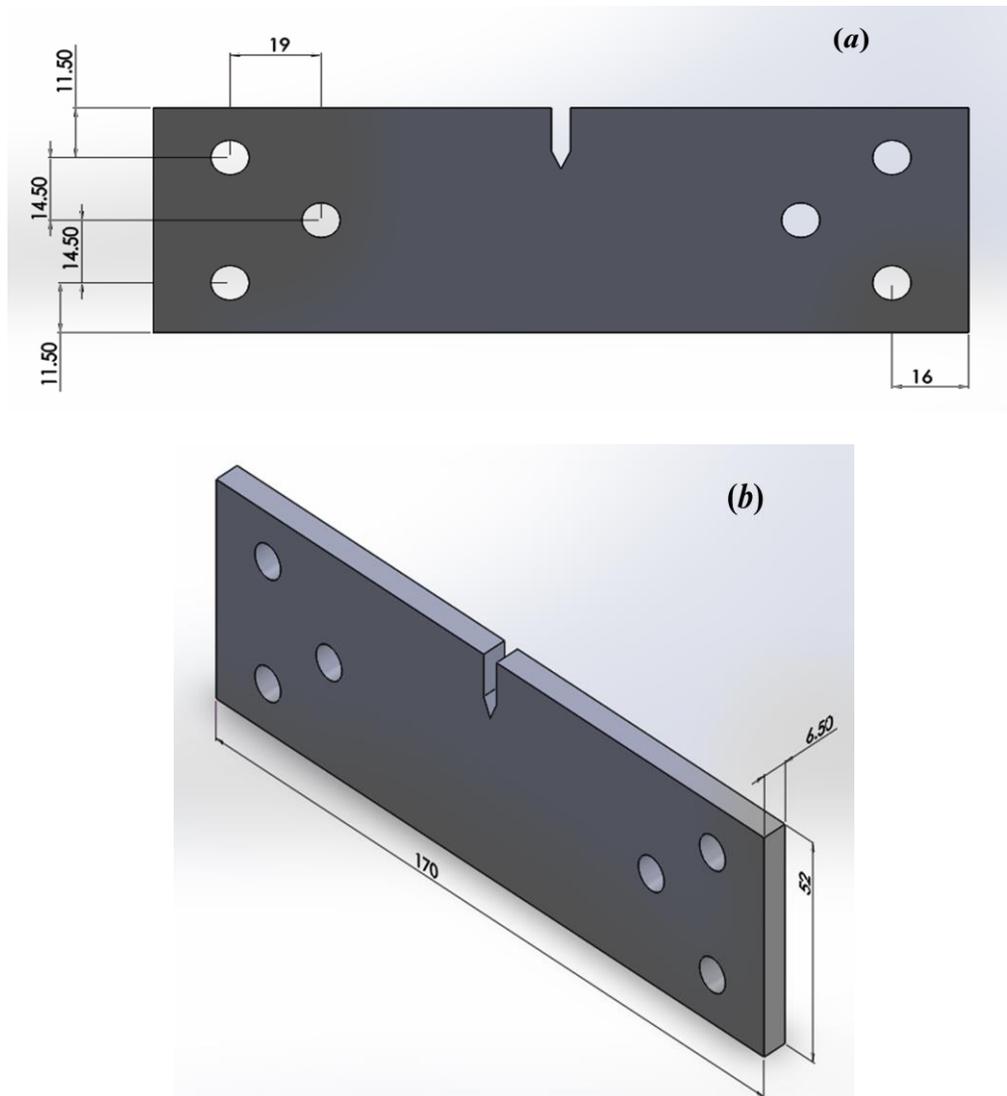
Single Edge Notch Tension (SENT) Specimen geometry
